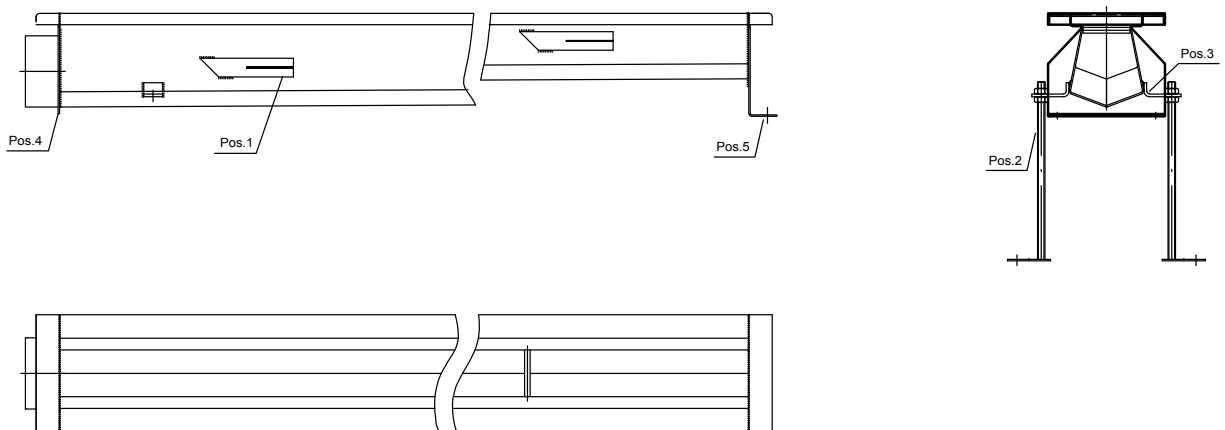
Positioning of the additional parts (Source: Own drawing)
